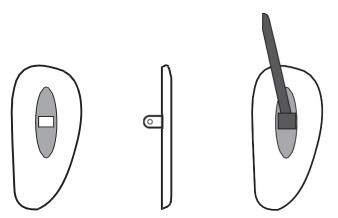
The *screw-on* pad design requires a small screw to secure it to the pad arm.
